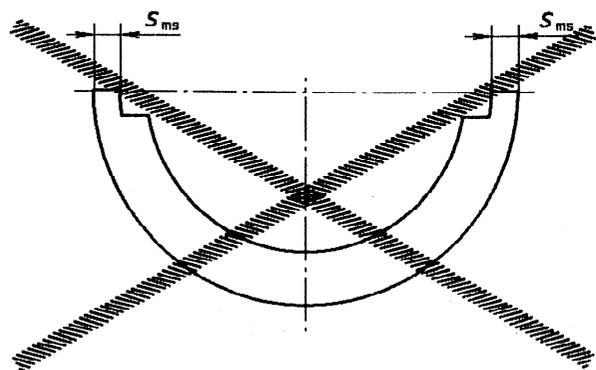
Stepped master shell not suitable for checking bearings of uniform wall thickness
